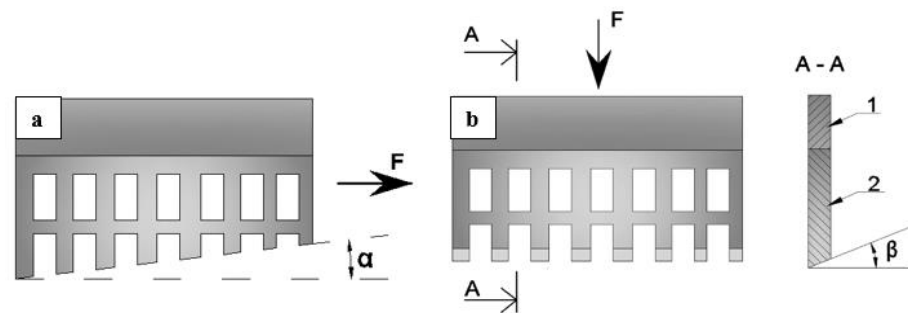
Single-layer cutting element with inclined teeth made of perforated steel strip: for horizontal (a) and vertical cutting (b) (F —pulling force, 1—gripper, 2—cutting blade).
